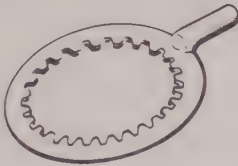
This tool, used to hold the clutch body steady, can easily be made up by having a short length of steel rod welded to an old clutch plate.
